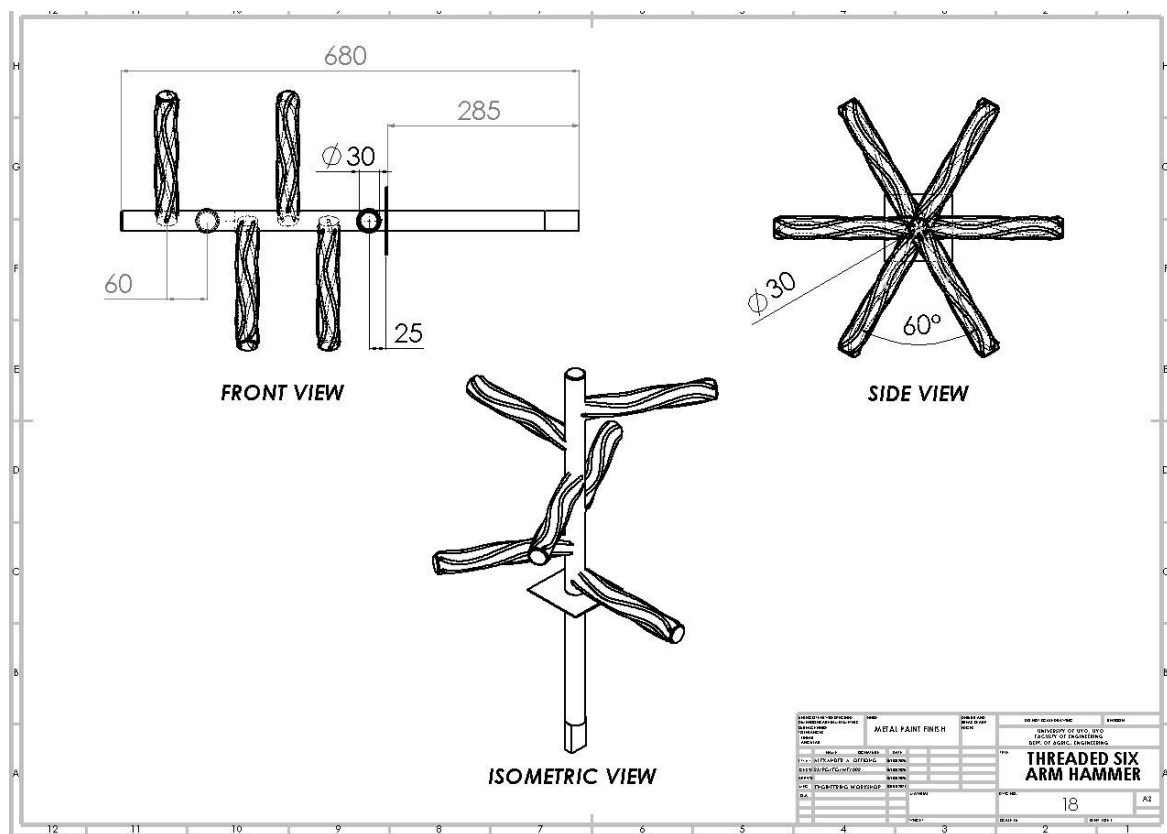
Component drawing of the vertical palm fruit digestion machine (Threaded Six Arm Hammer) by Reseracher (2025)
